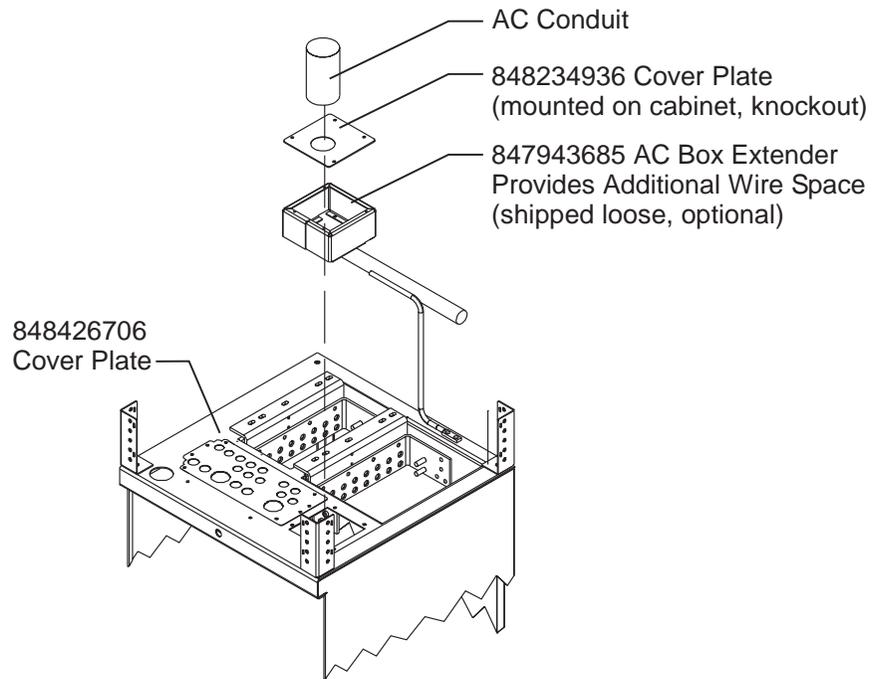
Attaching AC Conduit to H569-436 or H569-437
